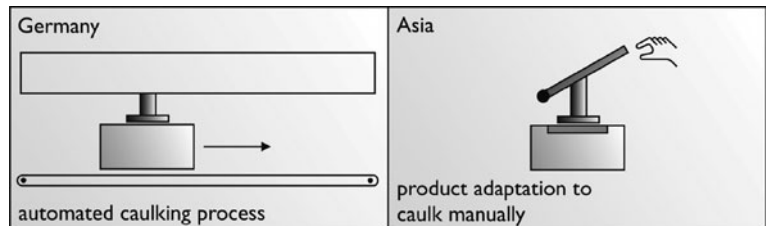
Manual setting eases manufacturing tolerances
